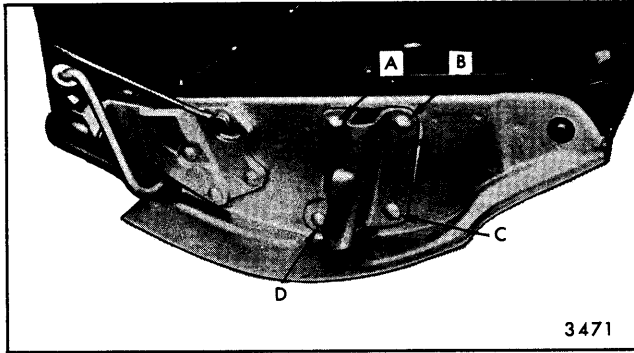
Tail Gate Left Lock Assembly - "B" Body
